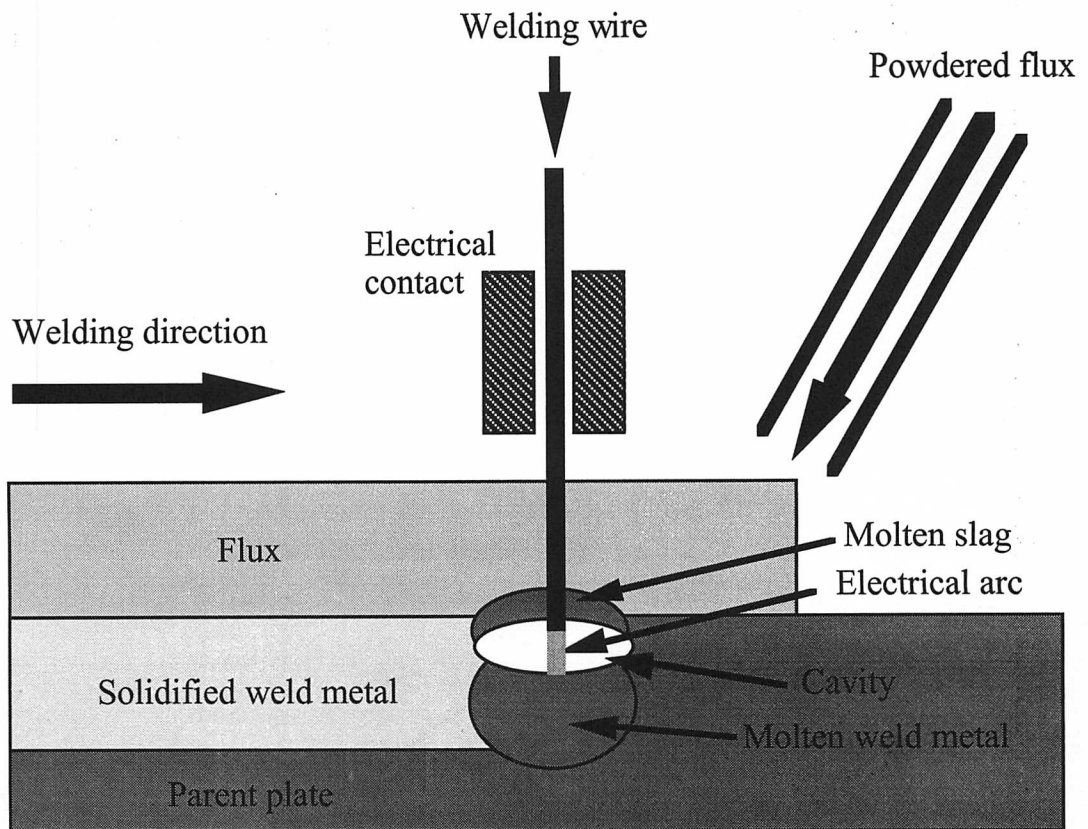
Schematic of the submerged-arc welding process.
